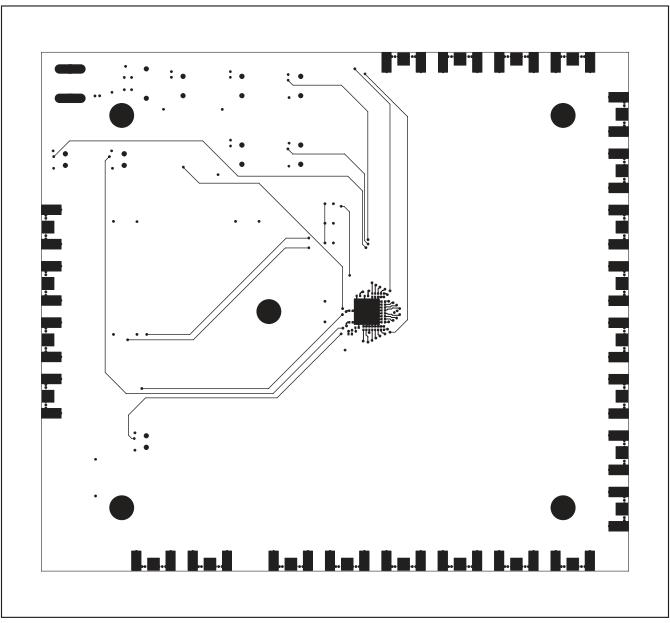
MAX3673 EV Kit PCB Layout—Solder Side
